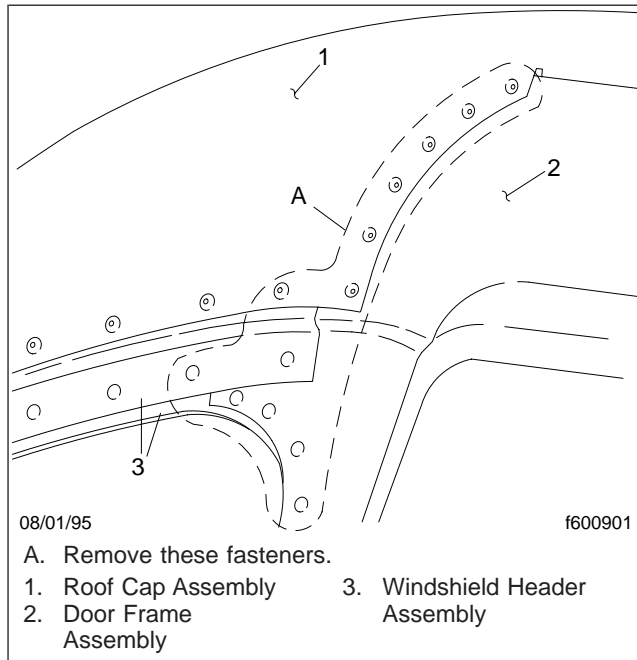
, Fasteners Attaching Door Frame to Windshield Header and Roof Cap
